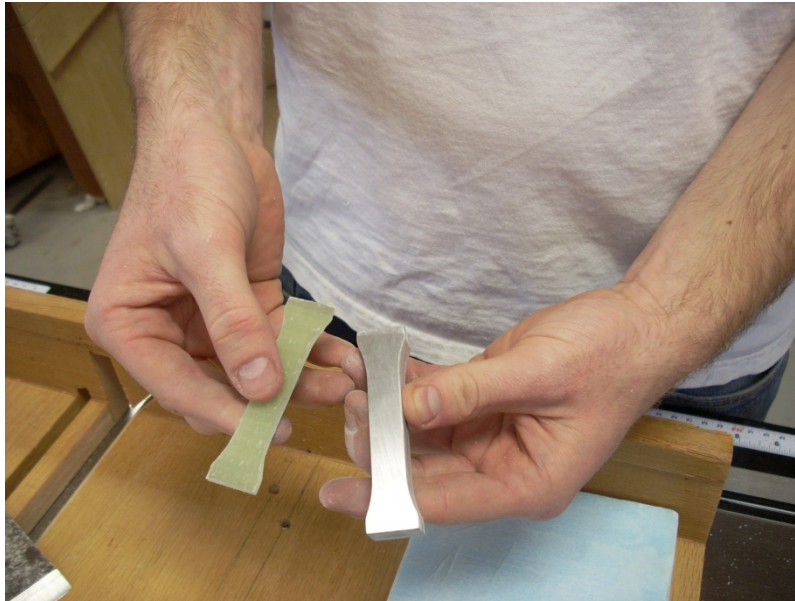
Final ASTM D695 Compressive Coupon Upon Removal from Aluminum Template
